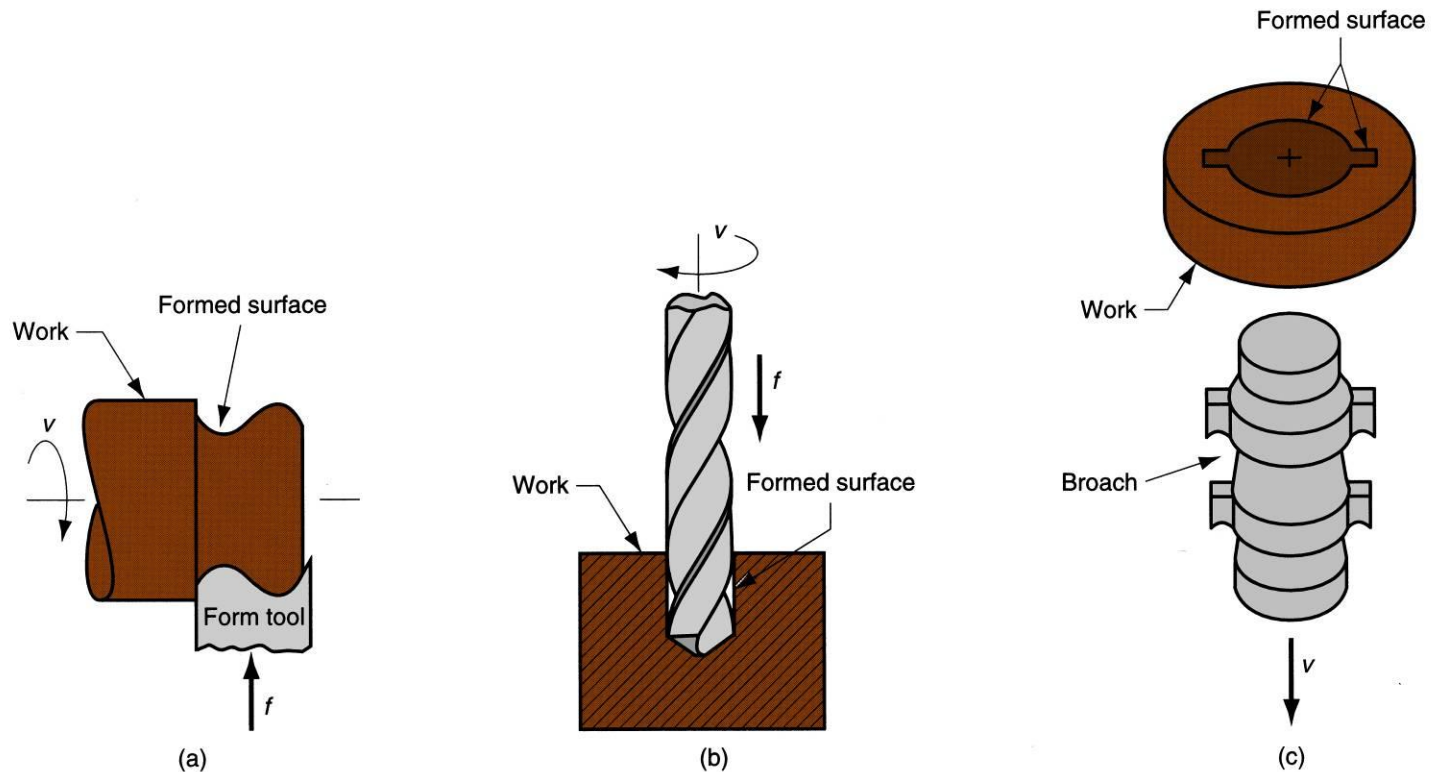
Forming to create shape: (a) form turning, (b) drilling, and (c) broaching.
